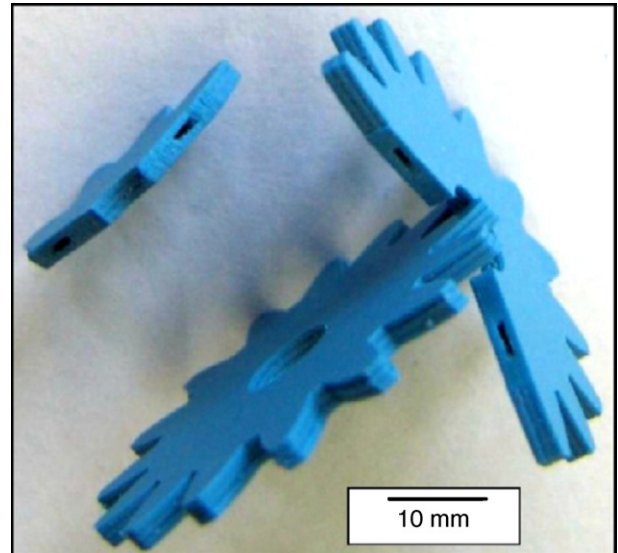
LTCC-based gear wheel with a partially embedded cavity fabricated using a low lamination pressure technique.<sup>48</sup>
